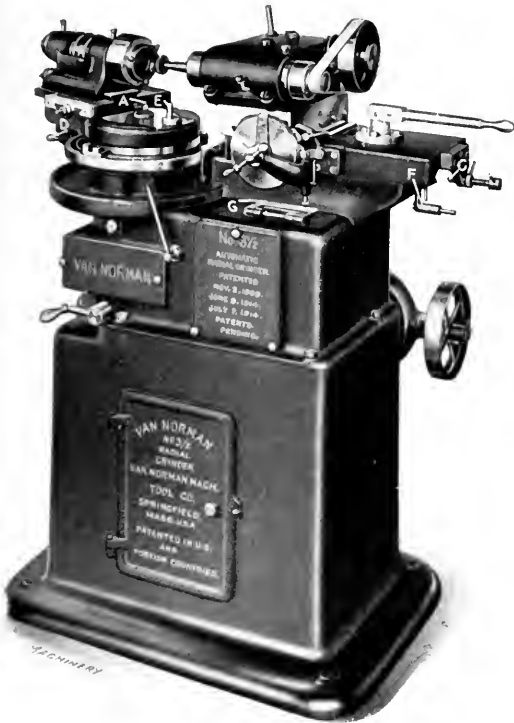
Van Norman No. 3½ Automatic Radial Grinder for grinding Single-row Ball Bearings
